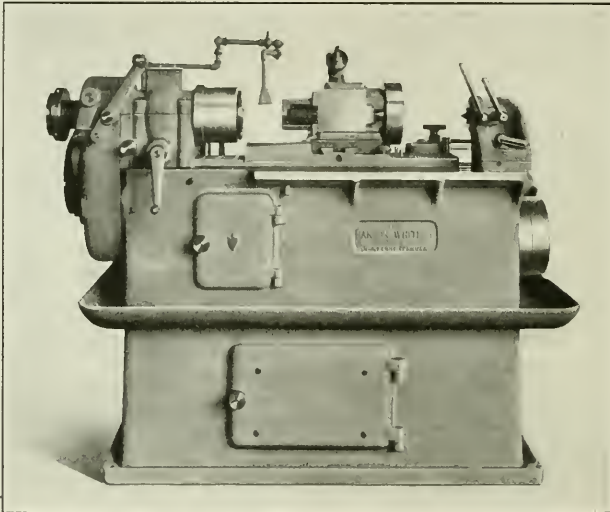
Hanson-Whitney Semi-automatic Universal Thread Milling Machine
